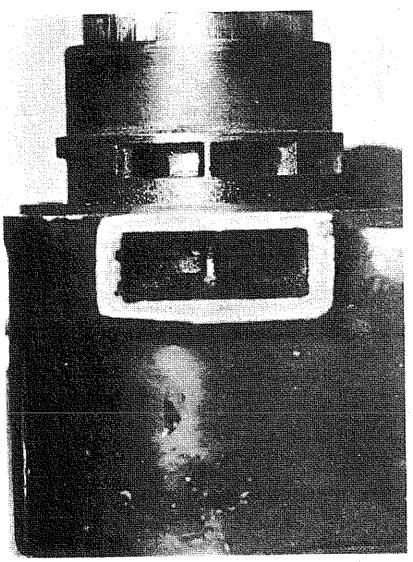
It is possible to examine the Piston Ring Gap through Transfer Port.
